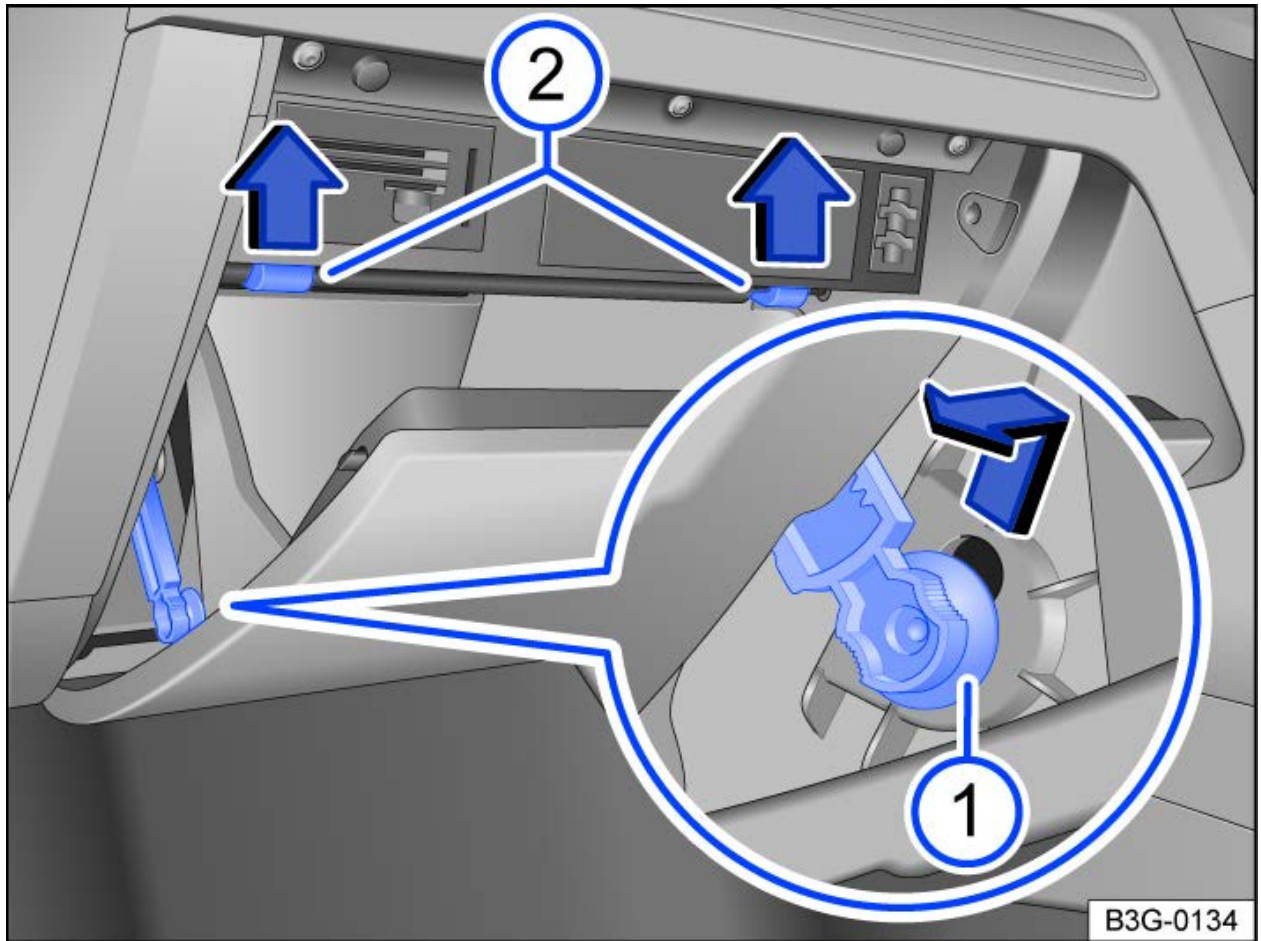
Fuse box cover in the instrument panel: right-hand drive vehicles, on the front passenger side.
